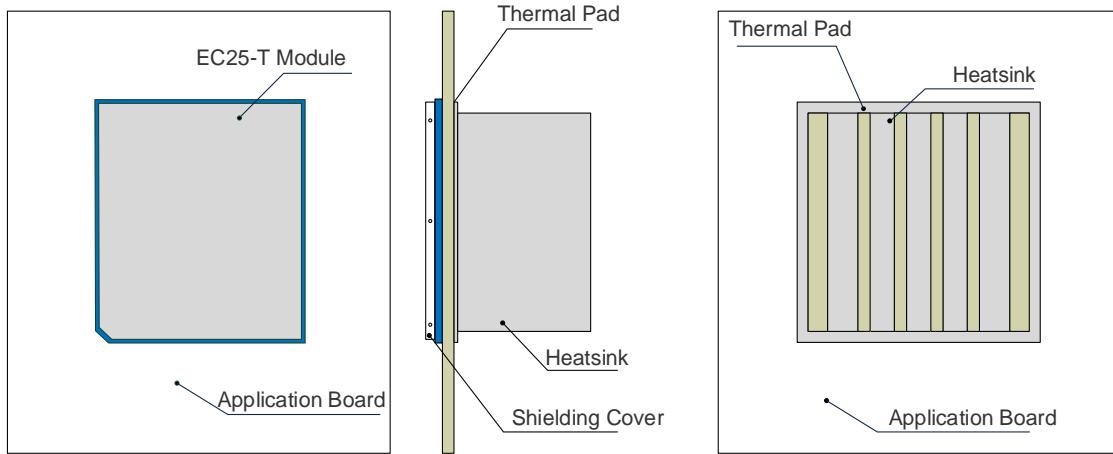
Referenced Heatsink Design (Heatsink at the Backside of Customers' PCB)
